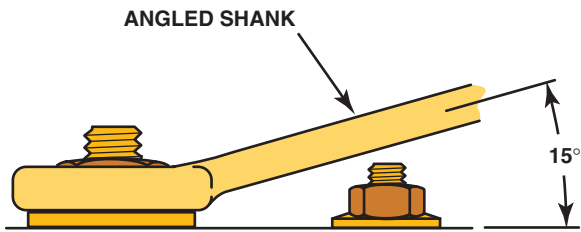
The end of a box-end wrench is angled 15 degrees to allow clearance for nearby objects or other fasteners.
